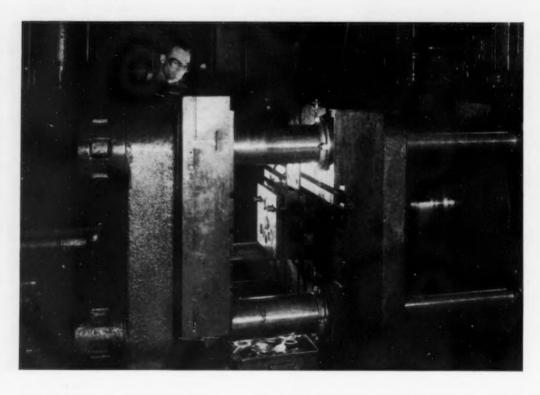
New machine developed by Dow Chemical Co. for the die casting of magnesium alloys.
